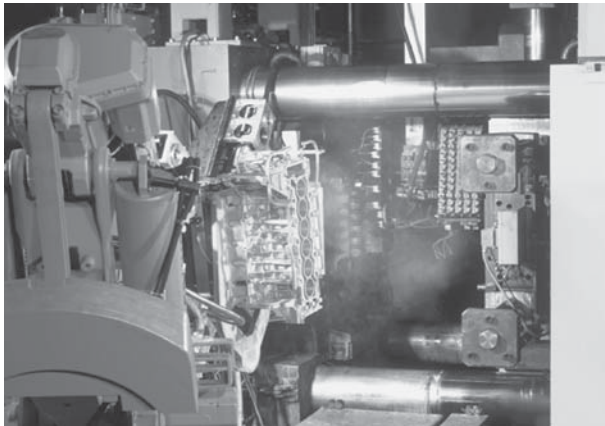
World's first composite magnesium/aluminium crankcase for a water-cooled engine developed by BMW - automated removal of the crankcase from the die casting machine <sup>43</sup>
